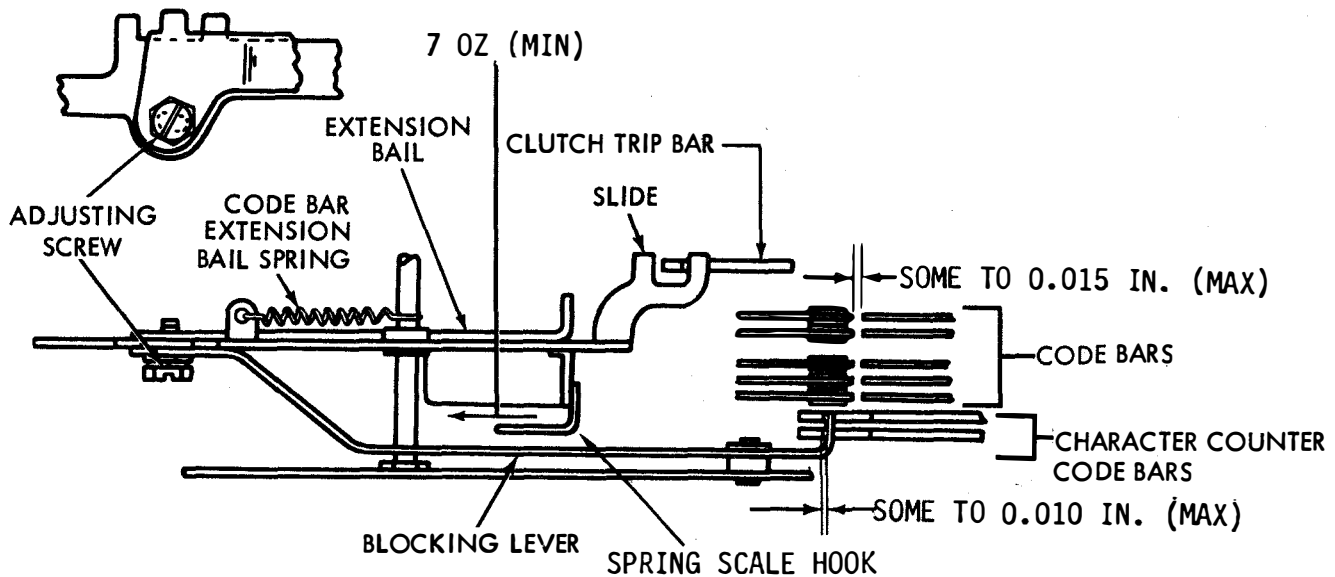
Code Bar Extension Blocking Assembly and Extension Bail Spring
